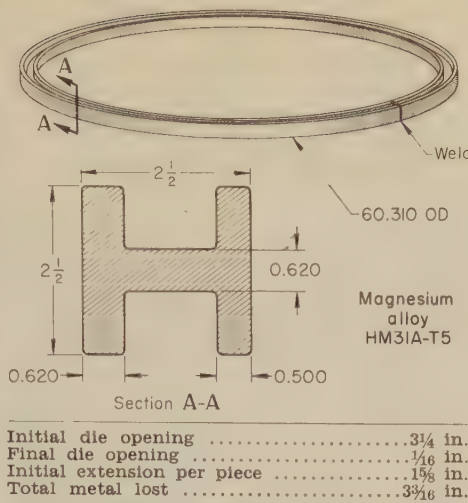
Ring that was made by flash welding a formed magnesium alloy extrusion (Example 447)
